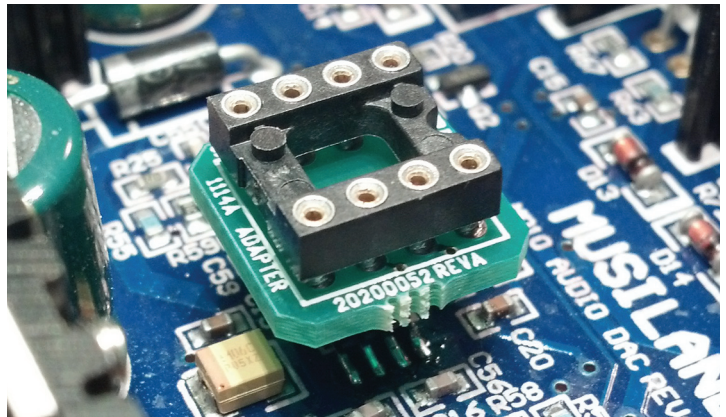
(Above) The Sonic Imagery Labs Model 1114A installed onto 0.050 2x4 pin header soldered to the existing PCB pads.
